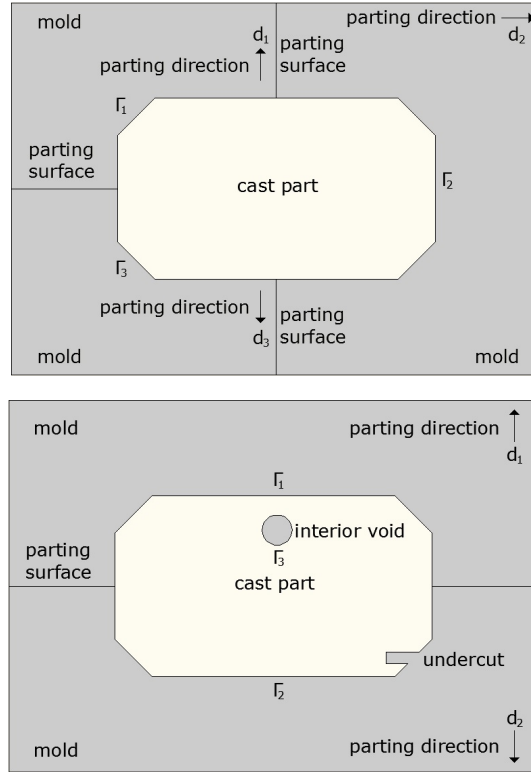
Top: moldable shape; bottom: non-moldable shape.
